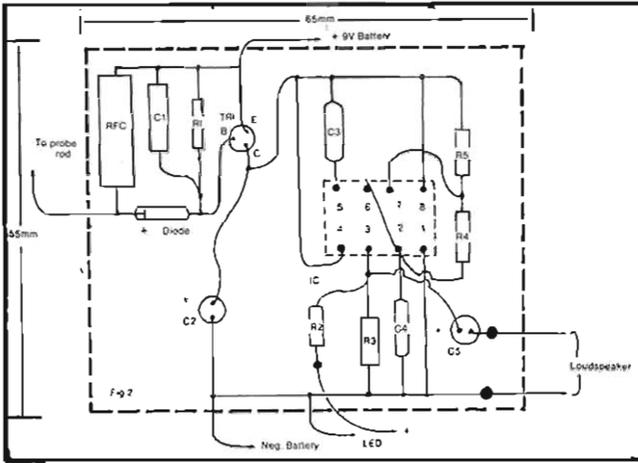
Layout and wiring of components on Veroboard circuit board. Note components are on reverse side of board.
